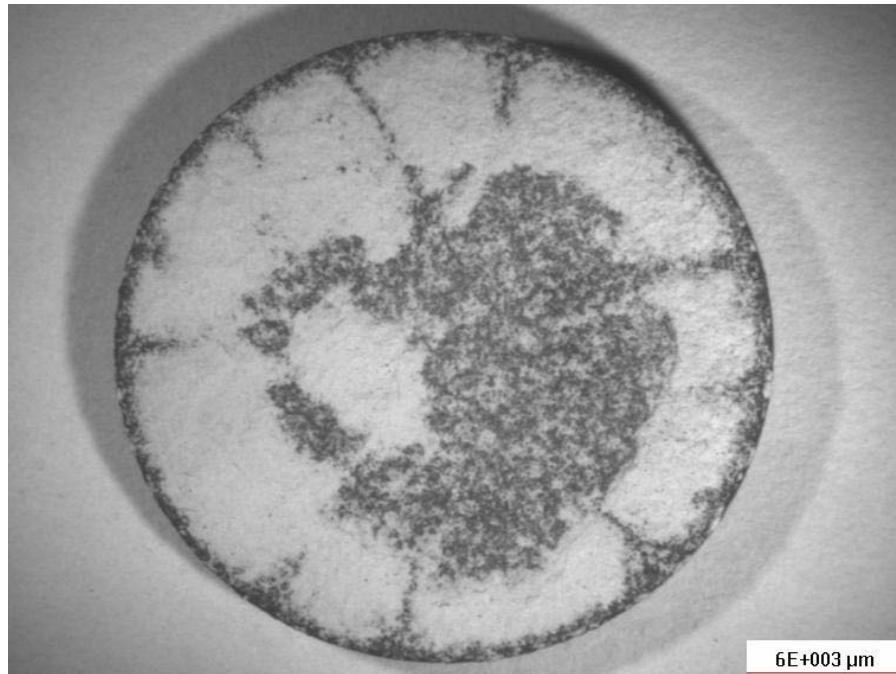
Fracture surface of the 45 mil specimen exposed in the pseudo-isothermal.
